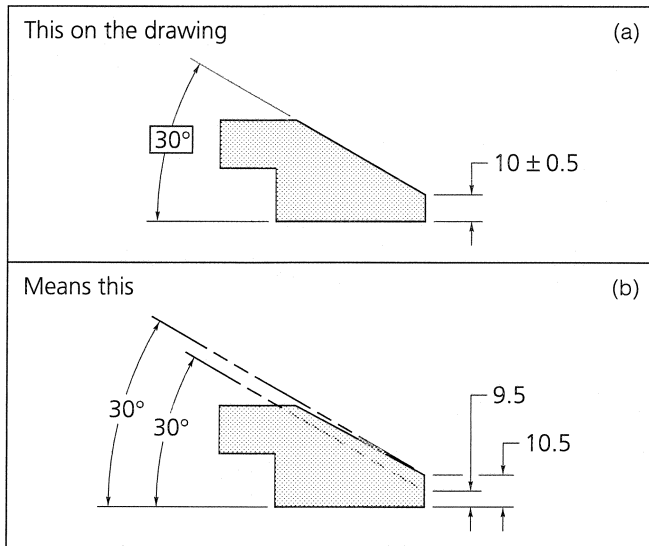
Tolerancing an Angular Surface Using Linear and Angular Dimensioning
